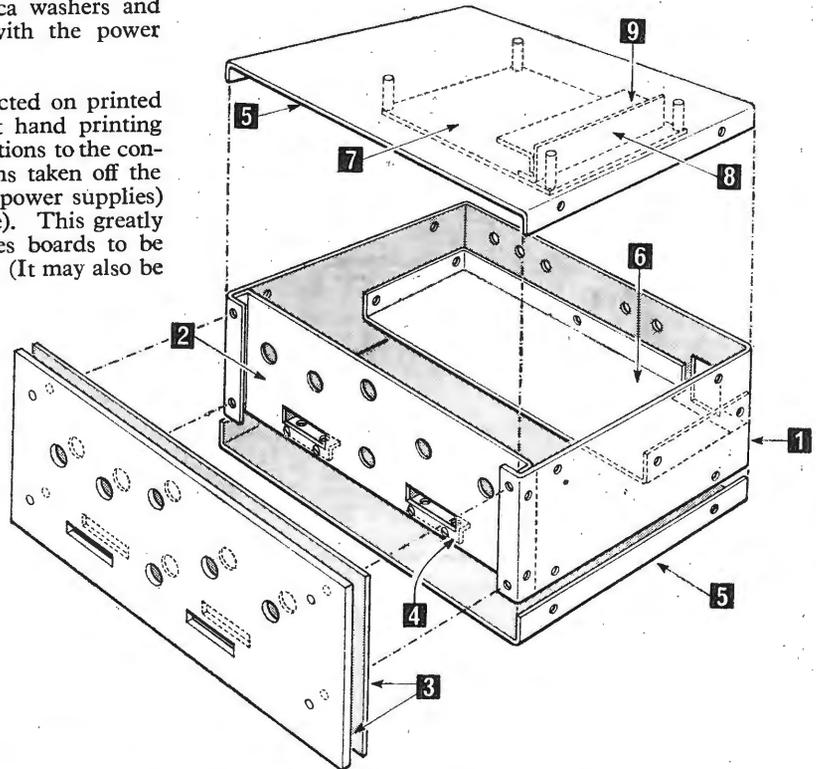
Perspective drawing showing assembly of metalwork. The pre-amplifier circuit boards are mounted on either side of item (6).
